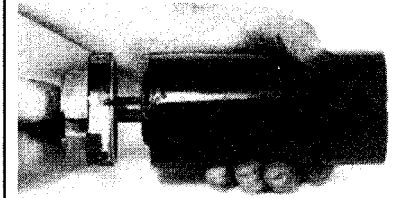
Pull on the armature shaft (and drive gear assembly) to remove them from the starter frame (housing)
